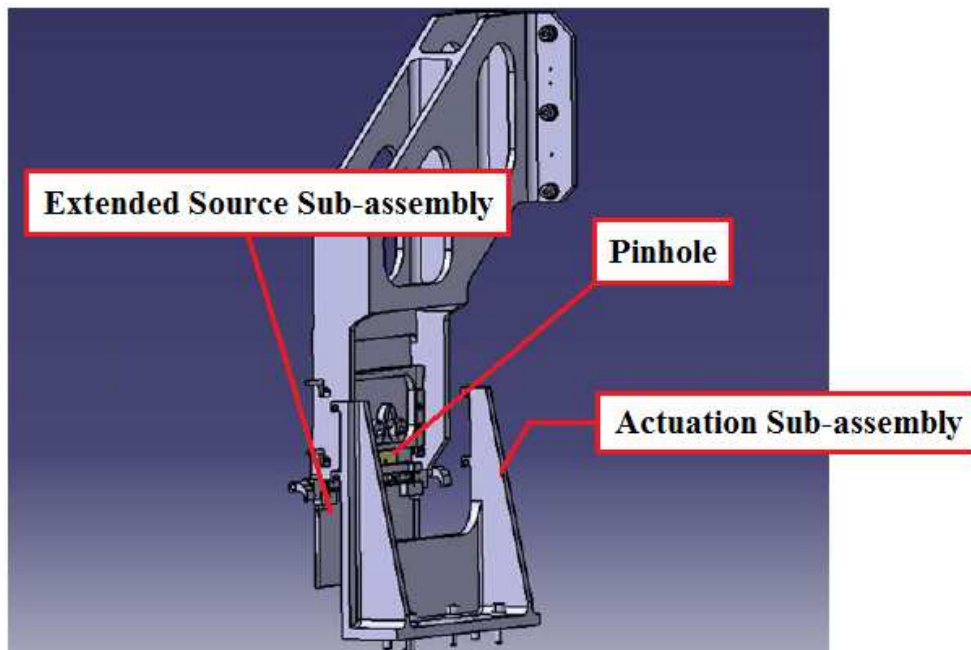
The Target Assembly and Actuation Sub-assemblies
